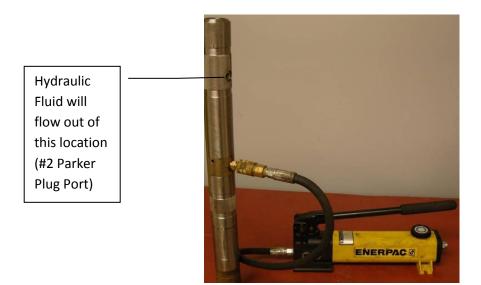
Enerpac Hydraulic Pump Connected to the Pump-in Fixture
